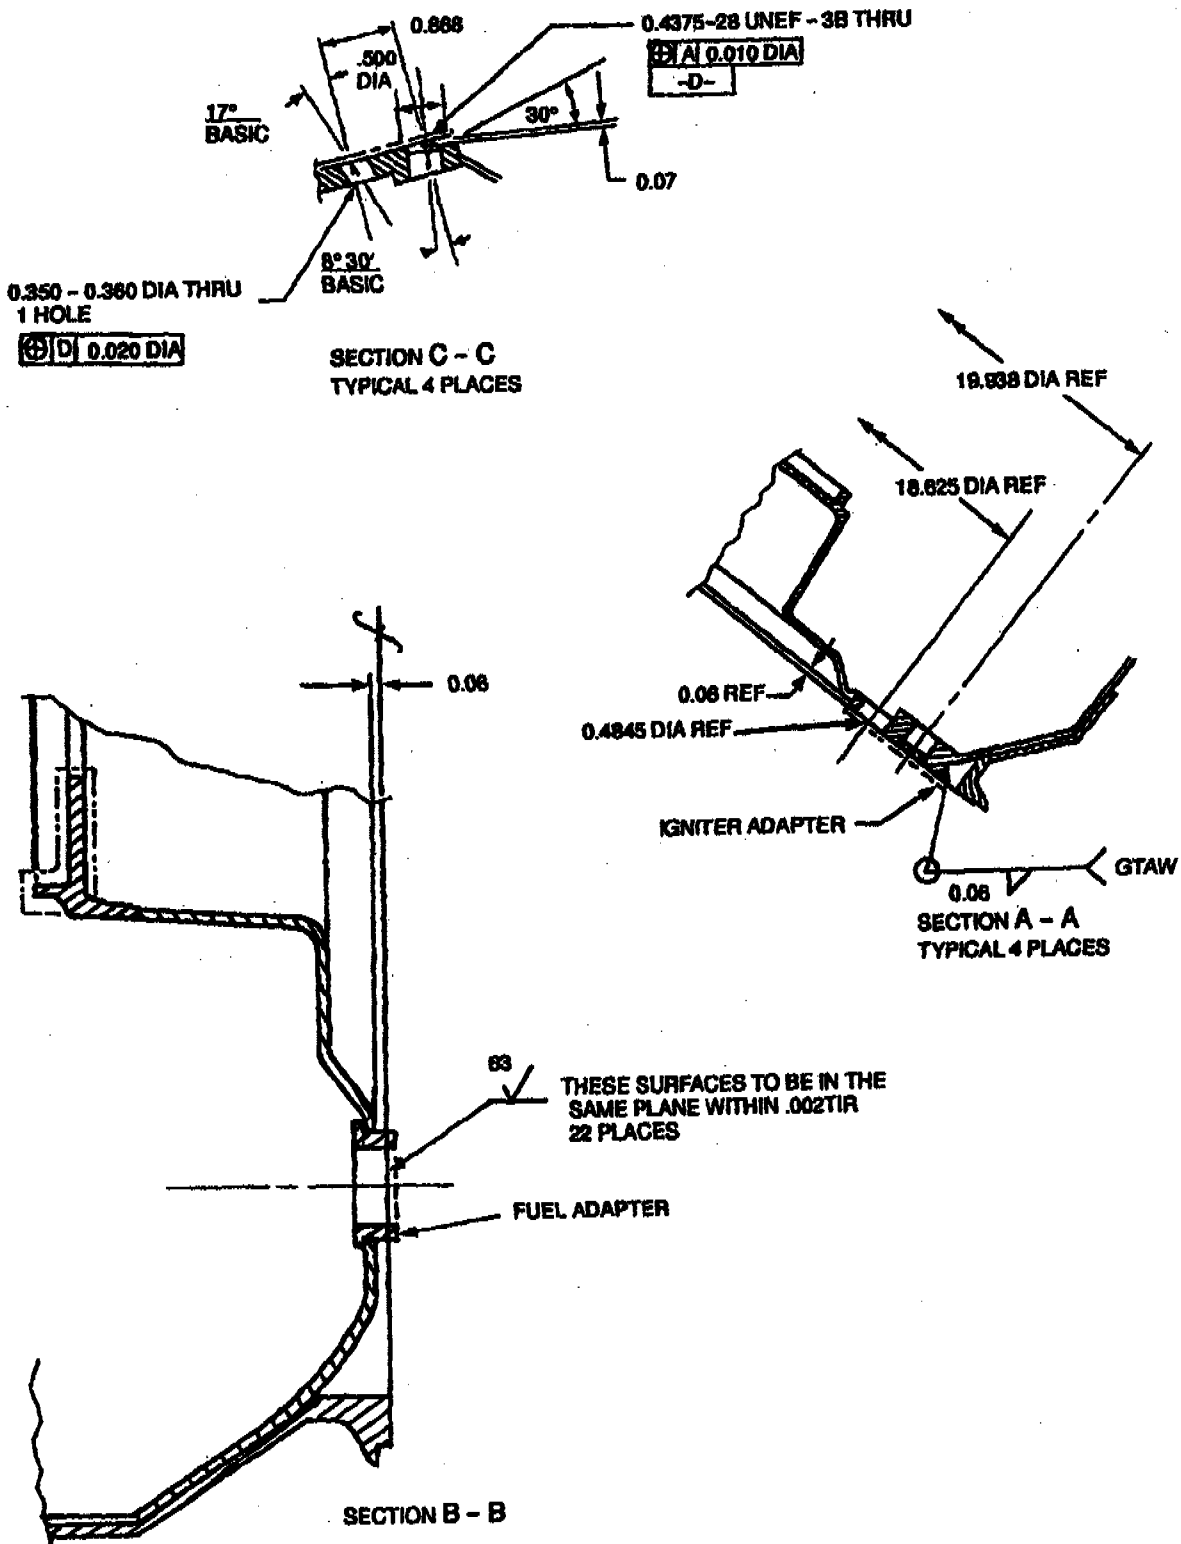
Ignitor and Fuel Adapters, Combustor Housing (Sheet 2 of 2).
